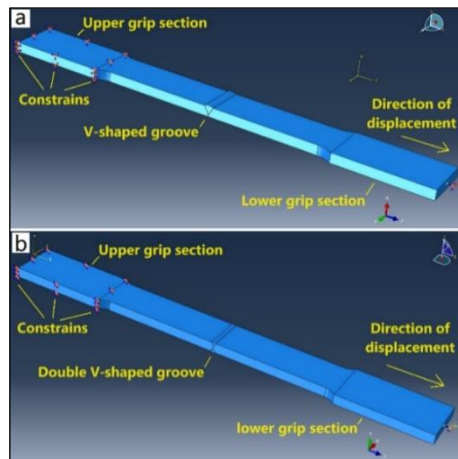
Kinematic boundary conditions showing constraints and direction of displacement of tensile test model sample for (a) V-shaped groove and (b) double V-shaped groove welding
